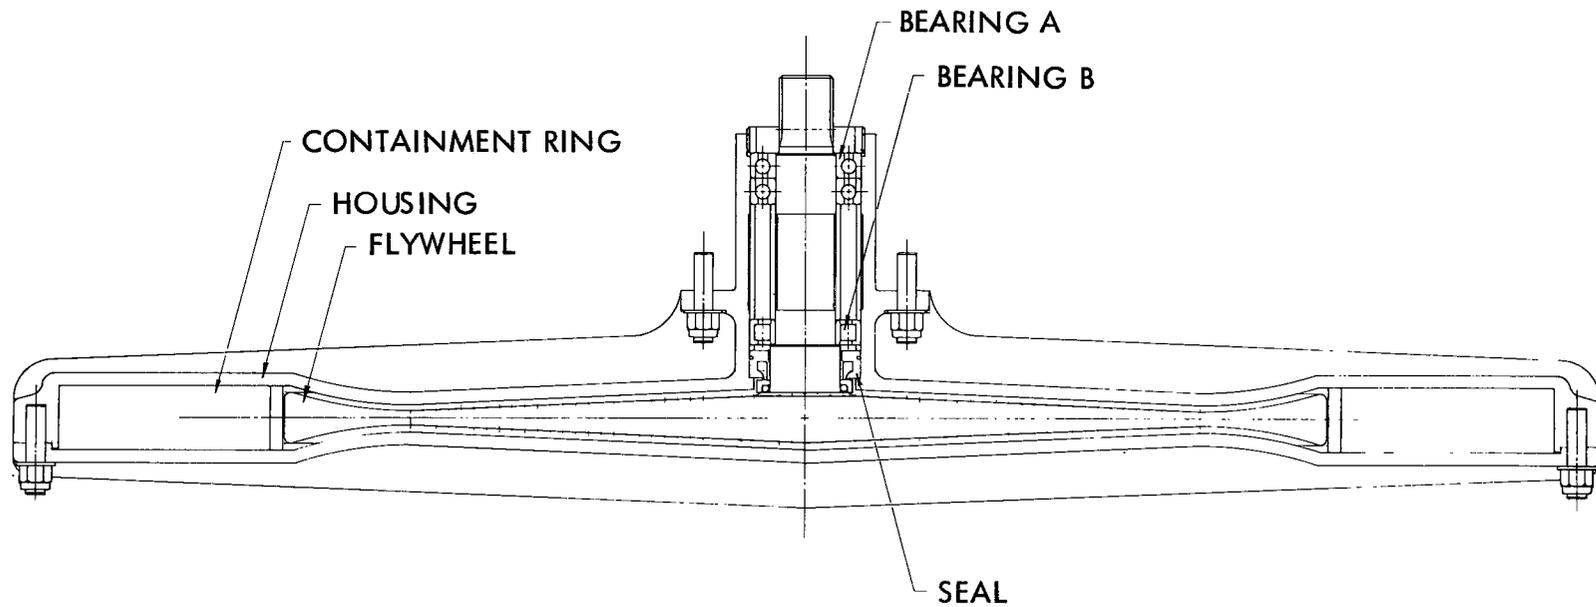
Preliminary Flywheel Design 3 (Family Car)
